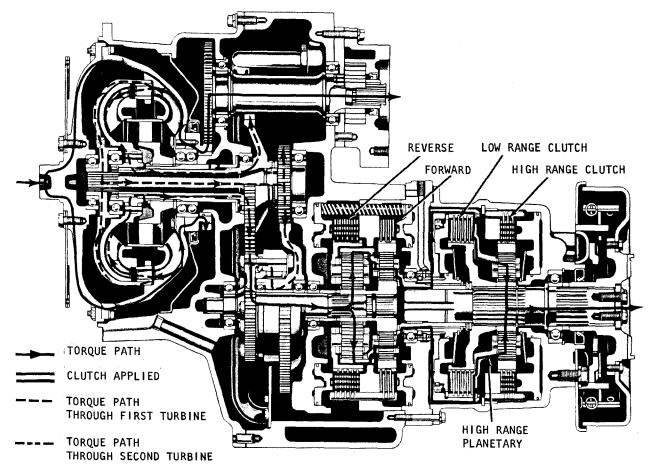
Reverse-2 torque path (TRT 2221-3, TRT 2421-3 overdrive transmission)
